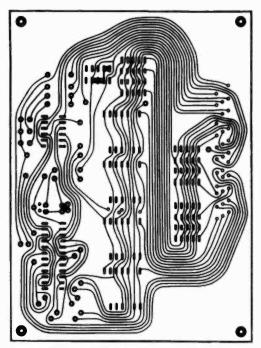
FOIL PATTERN of single-sided display board. Actual board measures $4 \times 5 \%$ inches.
